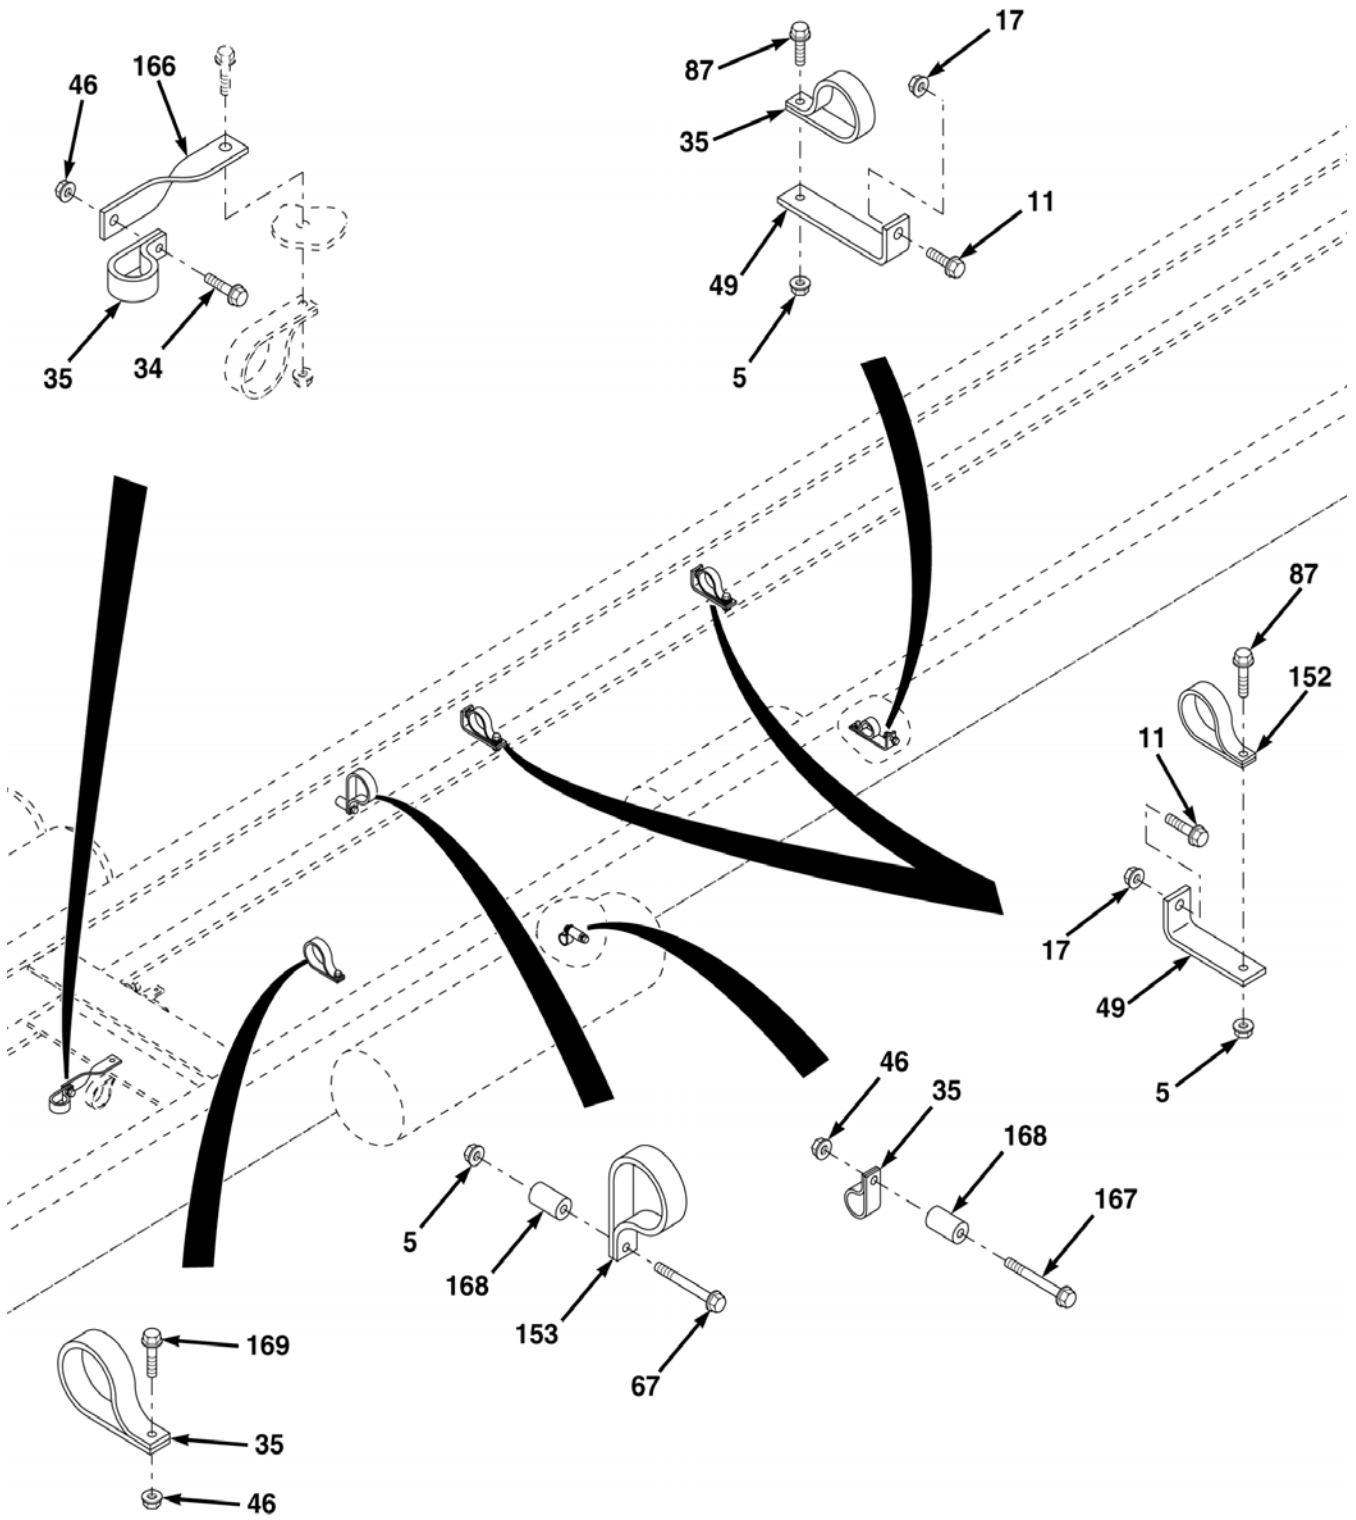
CHASSIS AIR (SHEET 13 OF 15)
